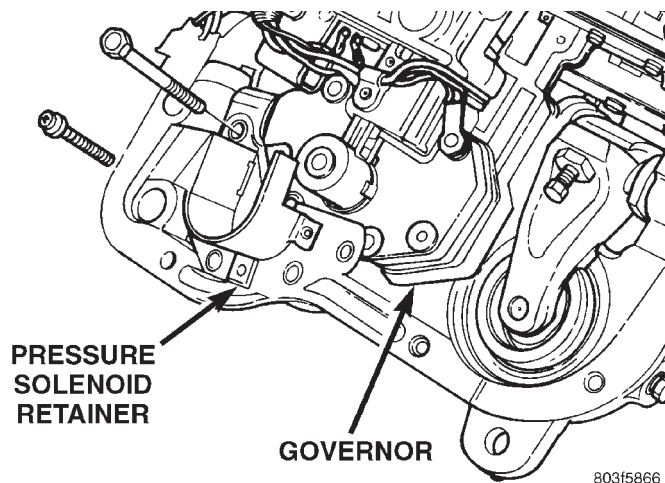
Governor Body And Retainer Plate Attaching Screw
